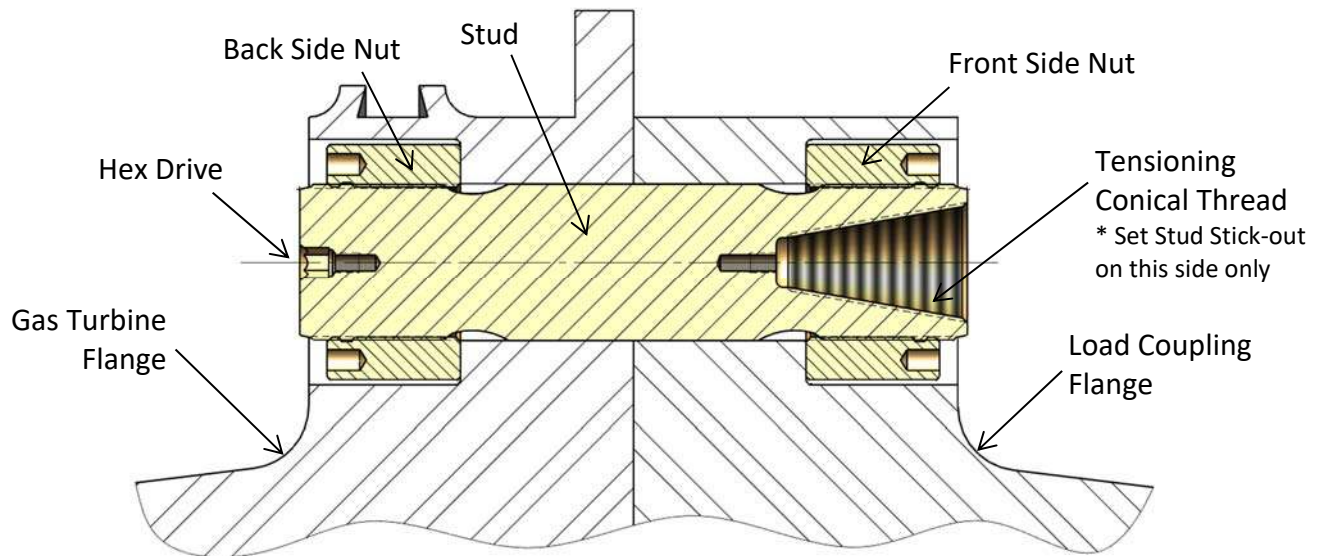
A – Cross-section View of Gas Turbine to Load Coupling Bolted Flange Connection
